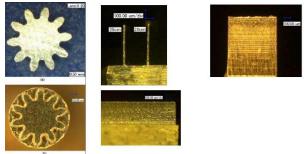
Micro parts made from 3-axis desktop milling machine [3]
